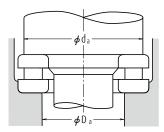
Face Supporting Diameters for Thrust Roller Bearings
